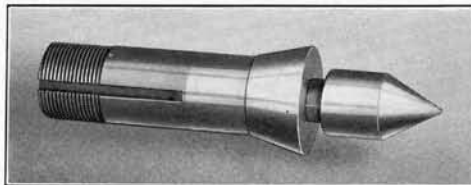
Center and Center Chuck. Center has taper fit in center chuck (solid collet). Center chuck fits headstock spindle
